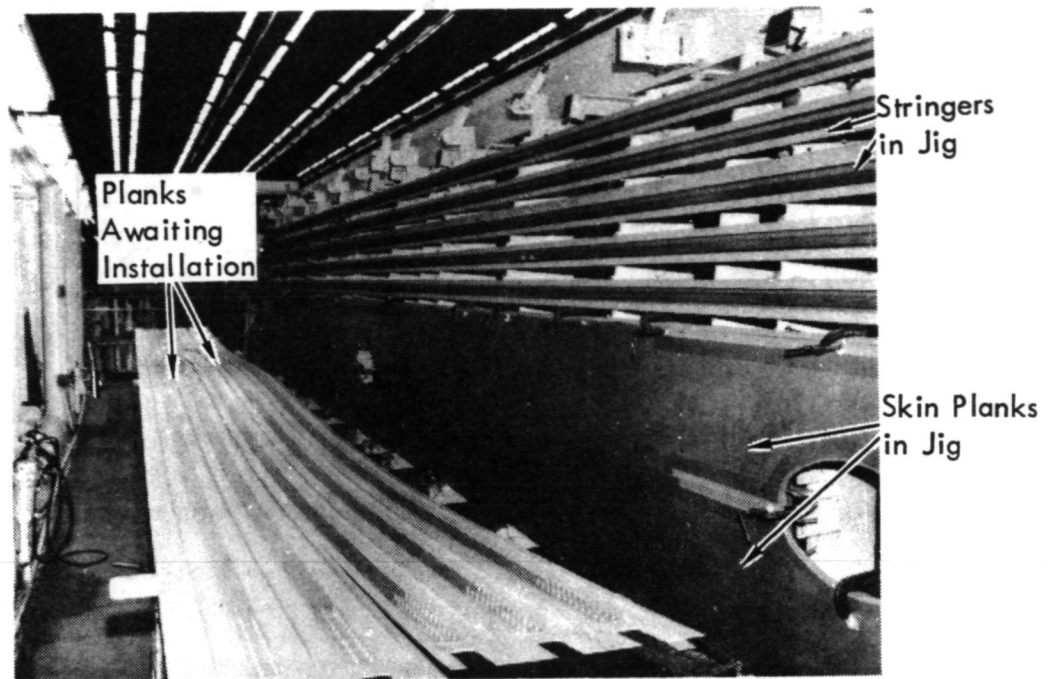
UPPER SURFACE IN FIRST-STAGE ASSEMBLY FIXTURE
